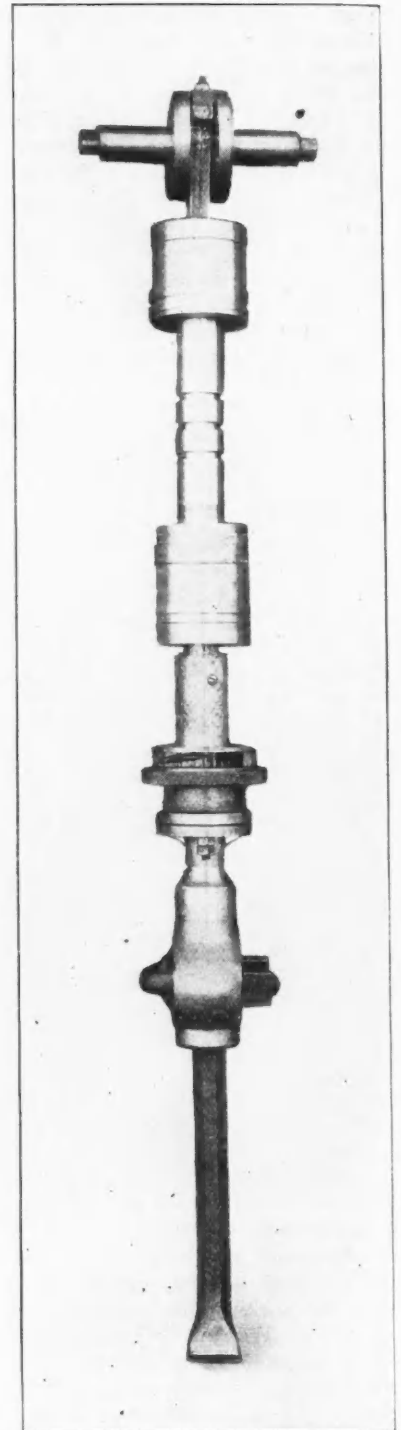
CRANK-SHAFT, PISTONS, ROTATING DEVICE, CHUCK AND DRILL STEEL
